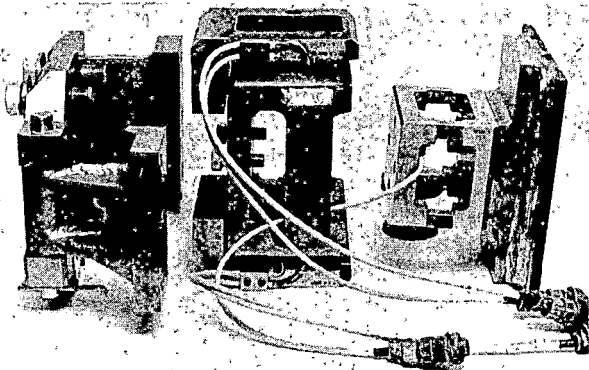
EXPLODED VIEW OF TRANSDUCER ASSEMBLY
